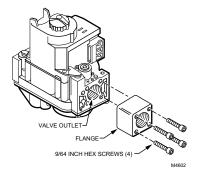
Fasten flange to valve firmly, but do not overtighten screws.
